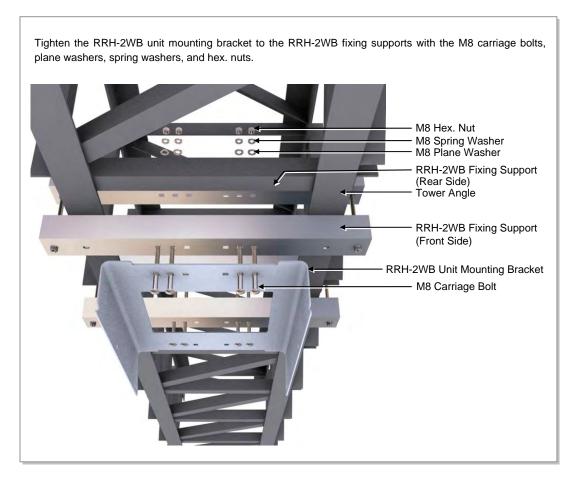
Fixing Tower Type RRH-2WB (3)
